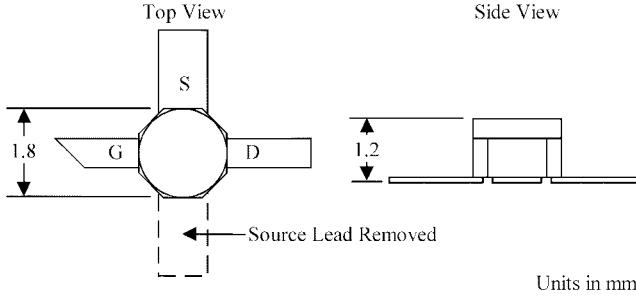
Top and side views of the packaged Kukje Corporation pHEMT.
